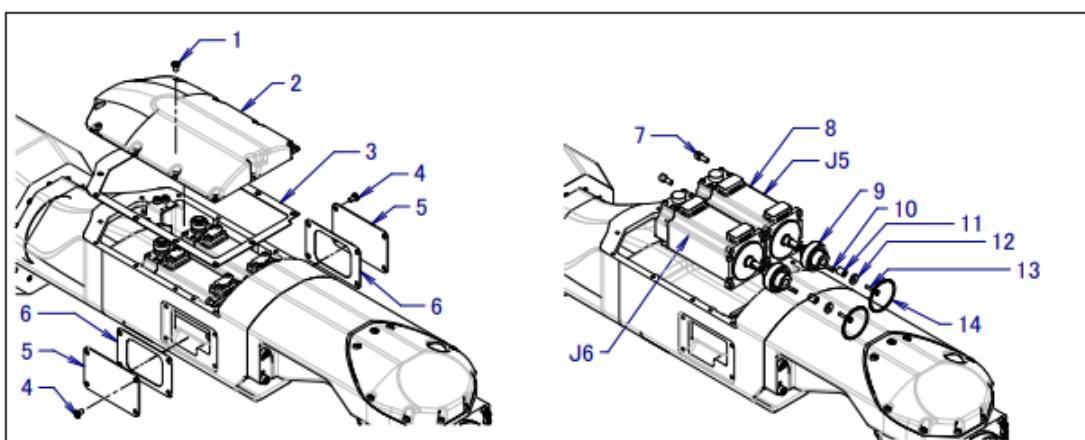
Replacing the J5-axis motor and J6-axis motor (ARC Mate 120iC, M-20iA)
